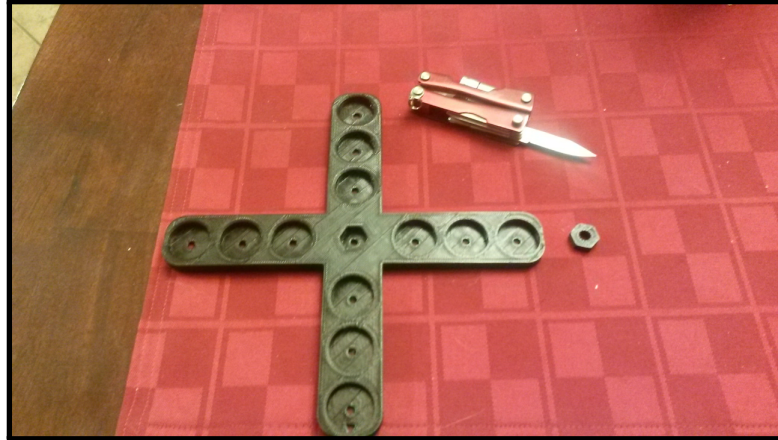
3D Printed Parts From *Introduction to 3D Printing* Experiment
